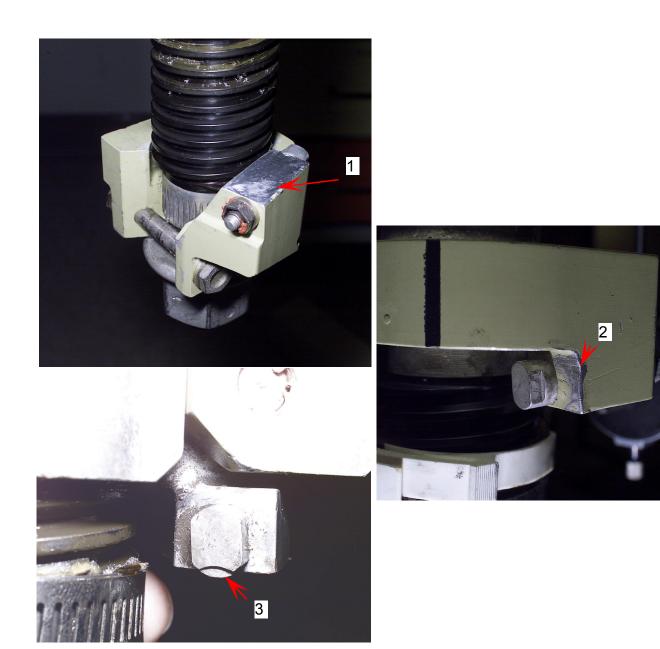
Three views, clockwise from upper left, showing the filing on the top of the lower mechanical stop lug, arrow 1, the missing primer from the upper mechanical stop, arrow 2 and the impression in the head of the acme nut lower stop bolt, arrow 3. (s/n DCA110(b))
